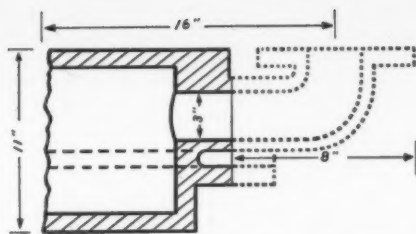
Example of designing to eliminate a troublesome part, in this case a 90° inlet elbow in a chemical process casting. Formerly, the elbow always failed before the main body casting. Its elimination reduced direct labor in molding, core making and cleaning, and tripled service life of the part.
